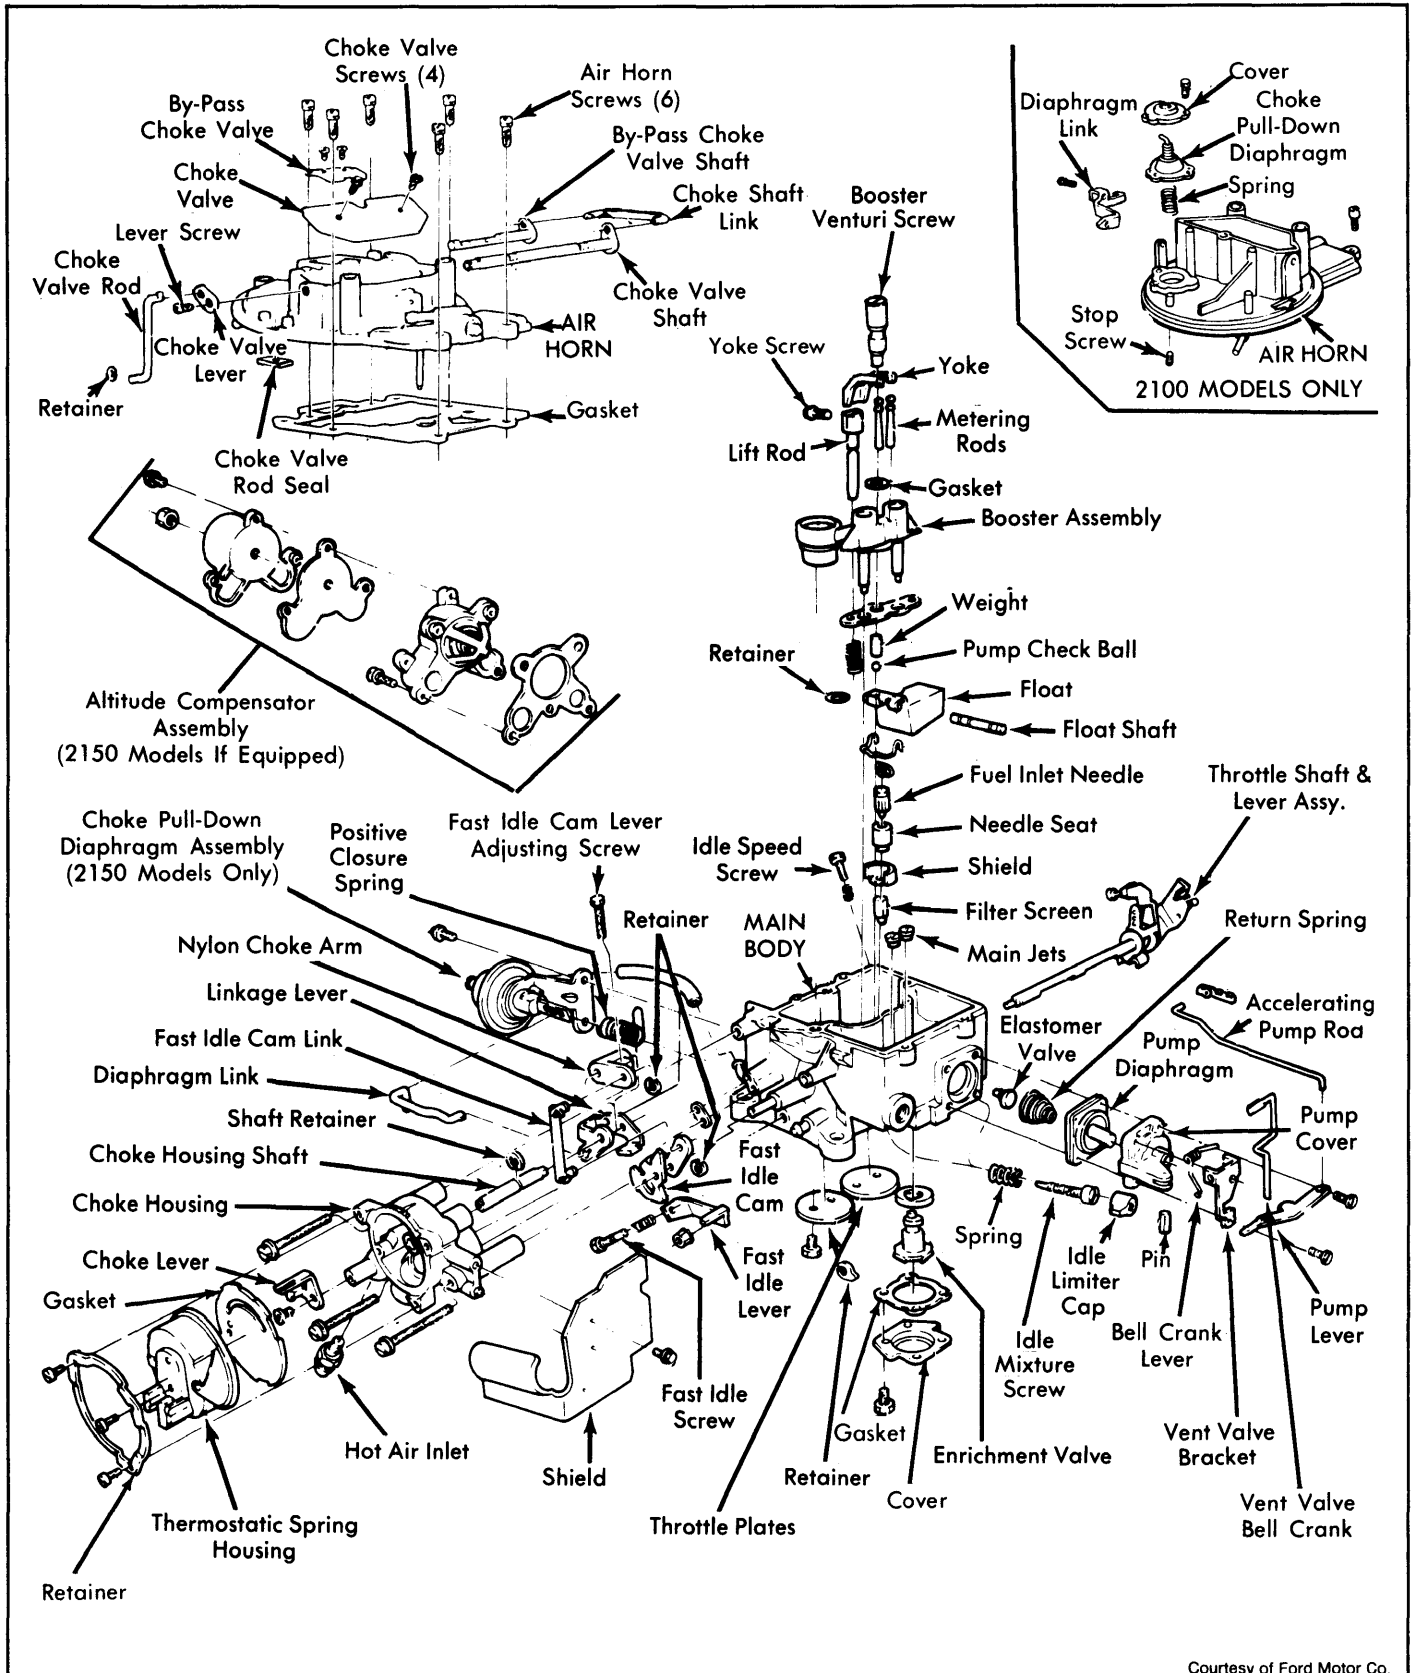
Exploded View of Motorcraft 2100 & 2150 Carburetors
